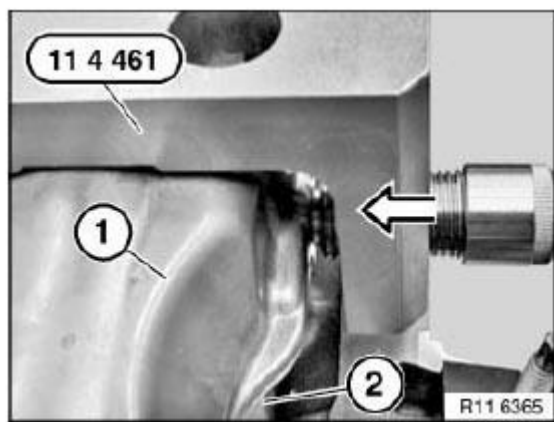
Tightening Screw Of Special Tool 11 4 461 To Ground Surfaces
